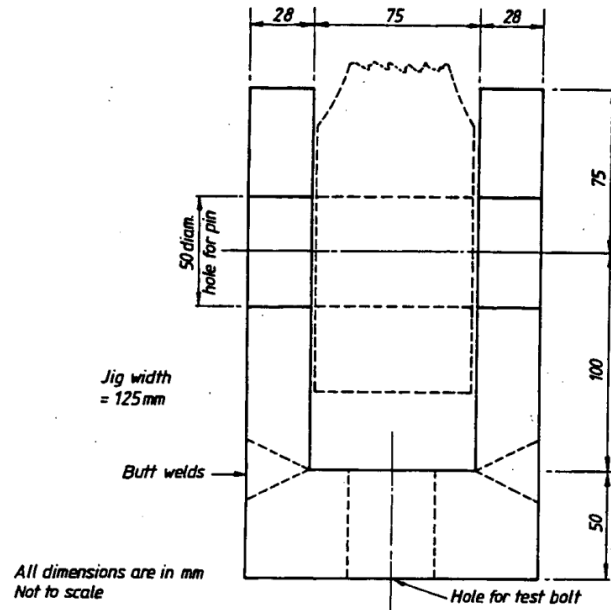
Details of jig for testing 36 mm diameter bolts in standard testing machine
